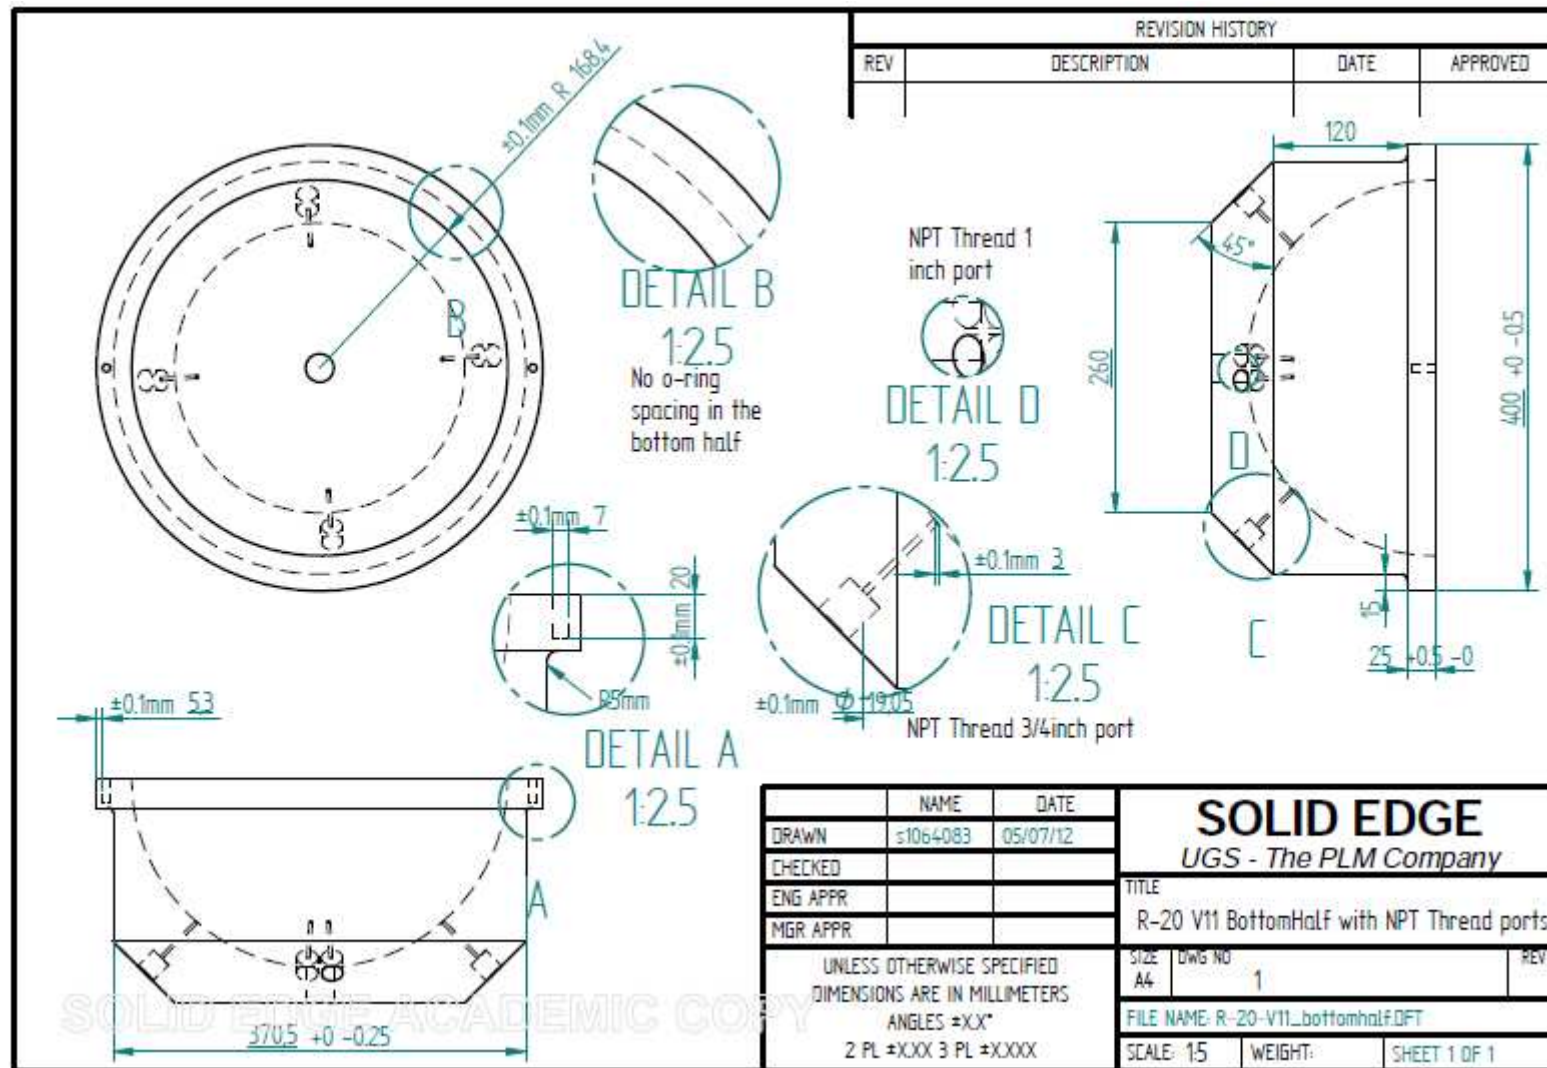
Drawing of R-20 bottom half of ignition chamber with NPT thread ports
